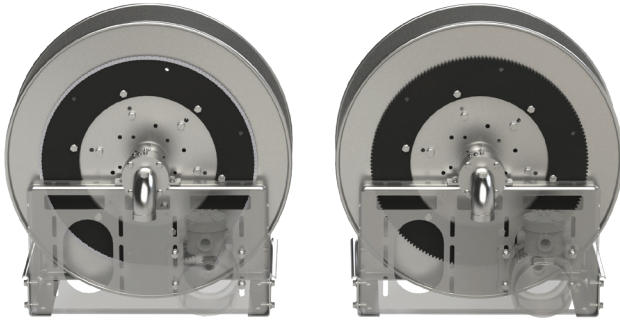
Reel shown with motor chain (left) and without motor chain (right)
